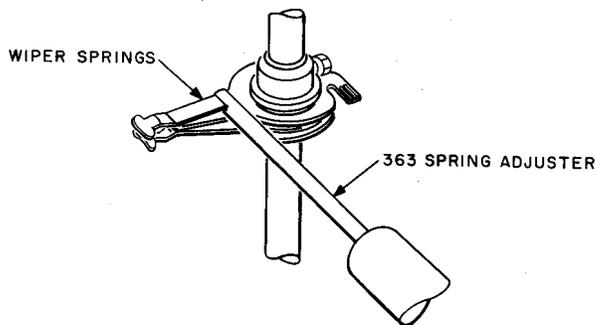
Method of Adjusting for Clearance Between Wiper Springs
